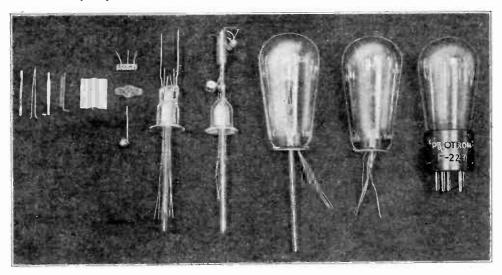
The various stages of assembly of a Pilotron P-227 radio tube. From left to right we have the filament, cathode, grid, plate, supports, stem, elements on stem, tube ready for evacuation, evacuated tube, and completed Pilotron.
